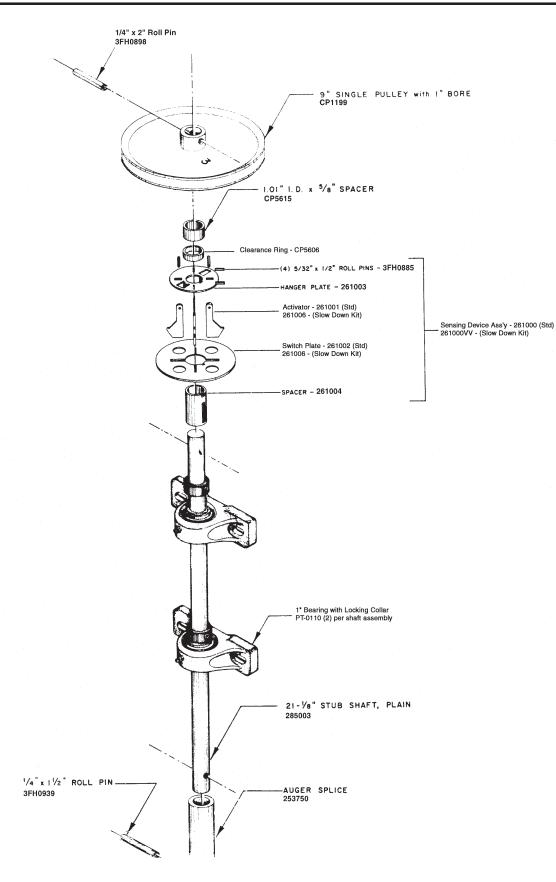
Stub Auger Assembly No. 2 (280002)
